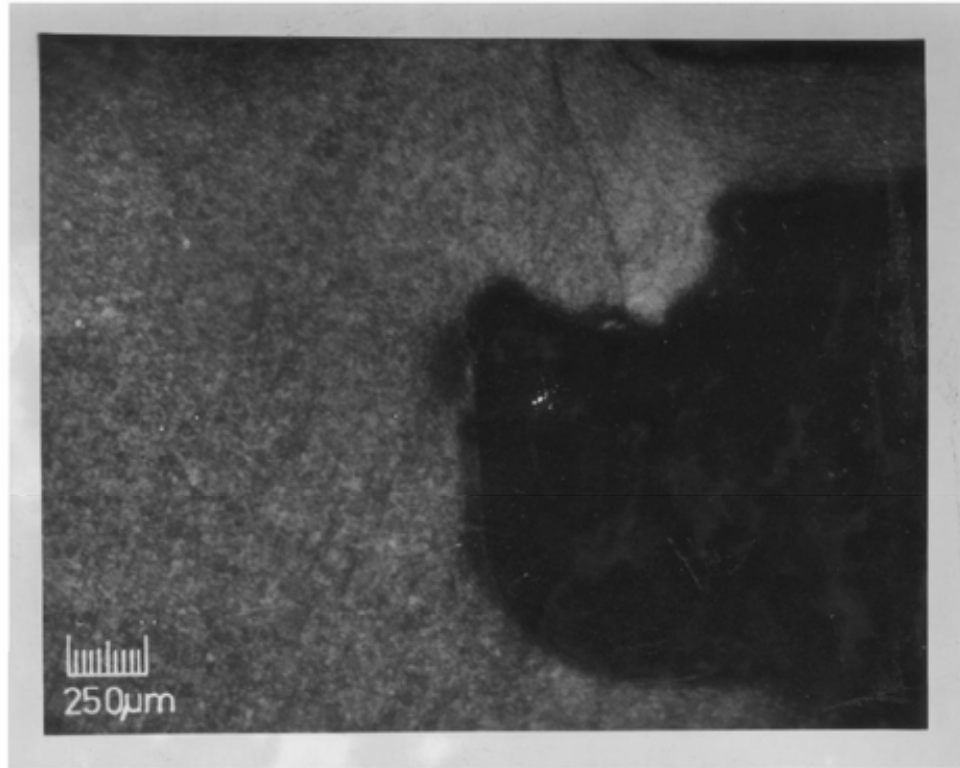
Photomicrograph showing Heat-affected Zone and Weld Line Defect in end-plug's weld area. Mag 40X.
